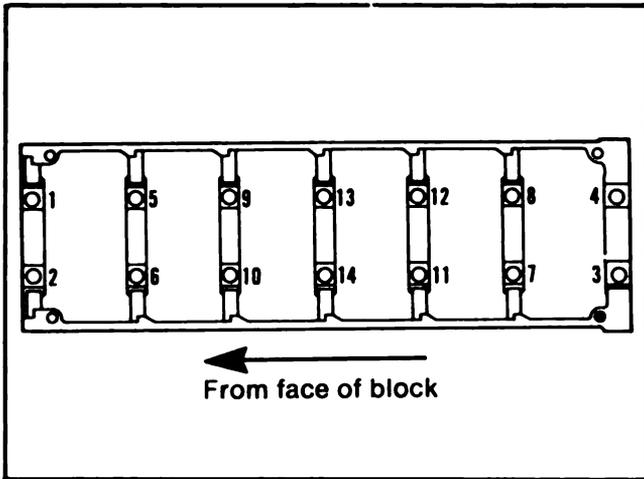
Tightening Sequence For The Main Bearing Capscrews.
